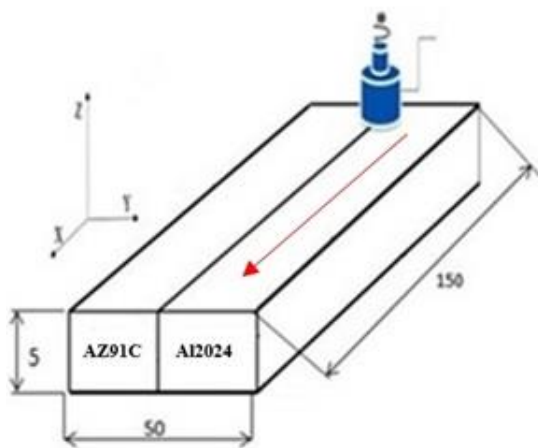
Dimensions of the used workpieces. (Dimensions are in mm.)
